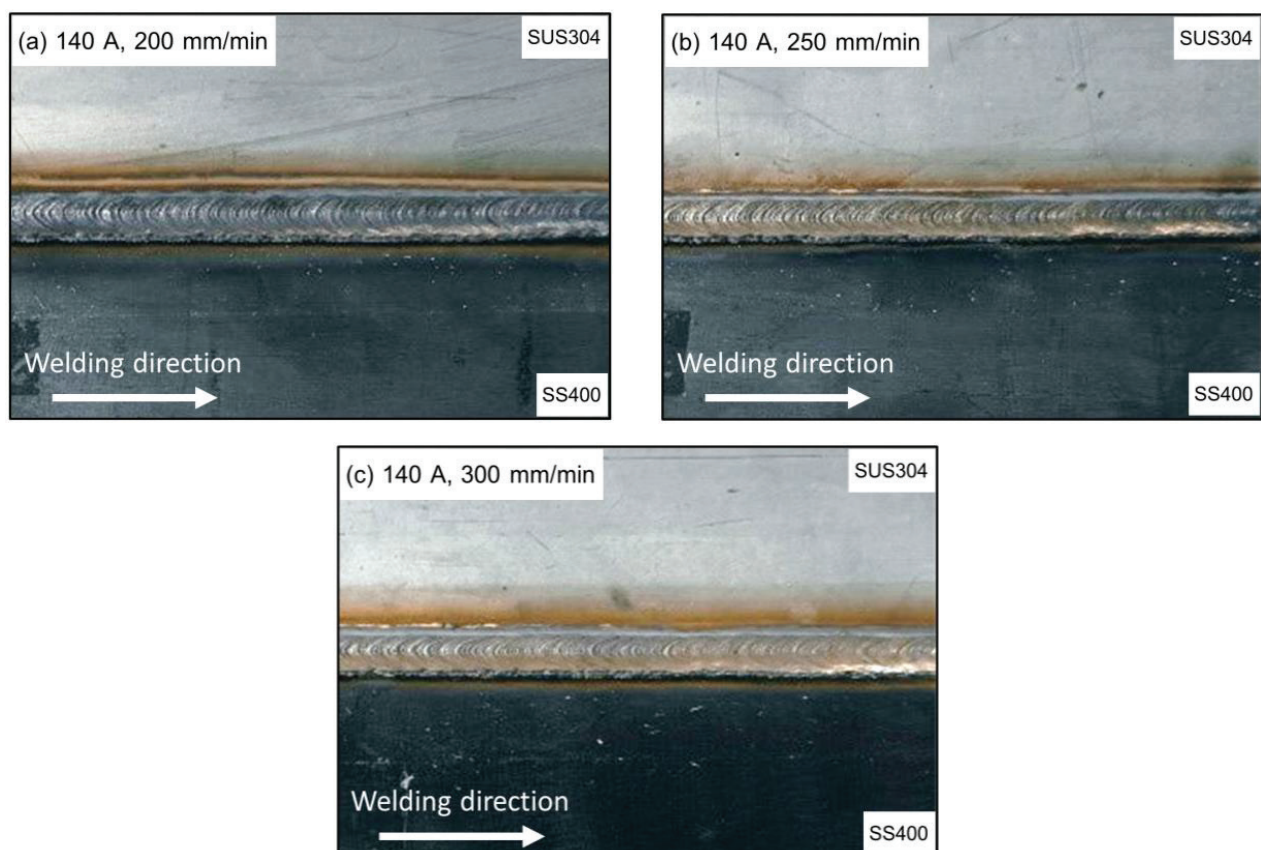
Surface characteristics of the weld seam at a welding current of 140 A and the welding speeds of (a) 200 mm/min, (b) 250 mm/min, and (c) 300 mm/min.
